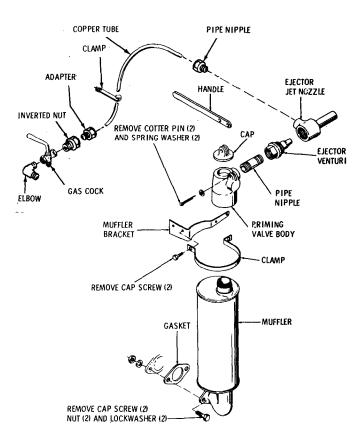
Muffler and exhaust primer, disassembly and reassembly.
